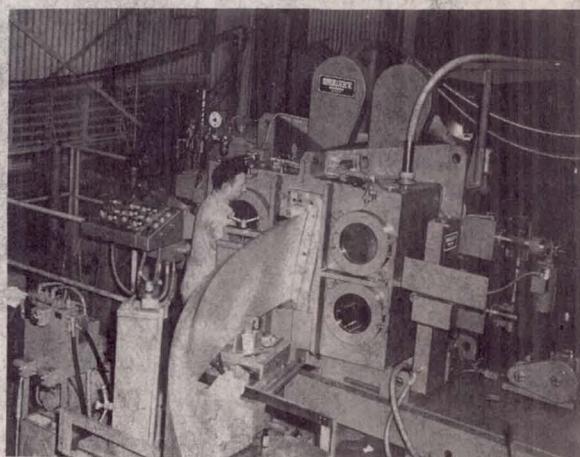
Split-chamber electron-beam welding of Saturn ring. (Marshall Space Flight Center.)
